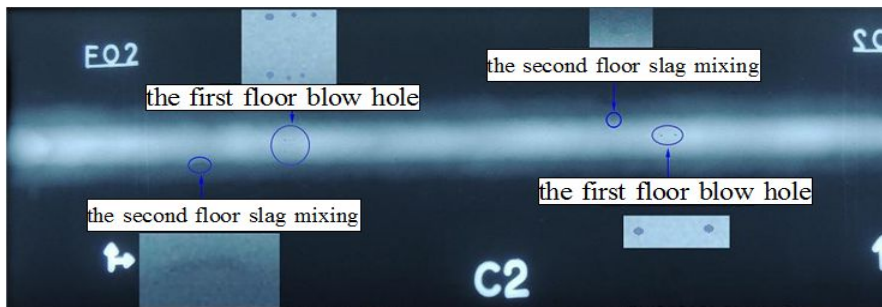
X-ray Radiographic test film in ATOS 80 welding specimen
